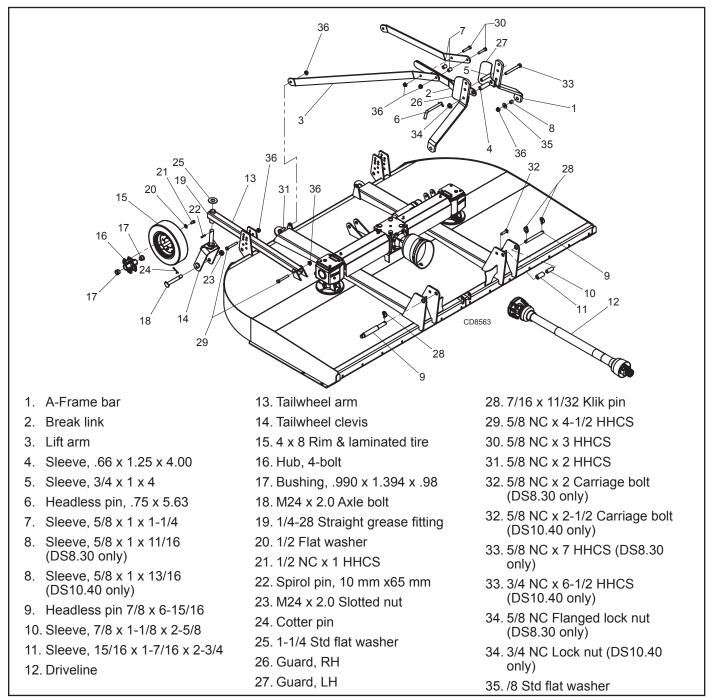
DS8.30 & DS10.40 Mounted Assembly
